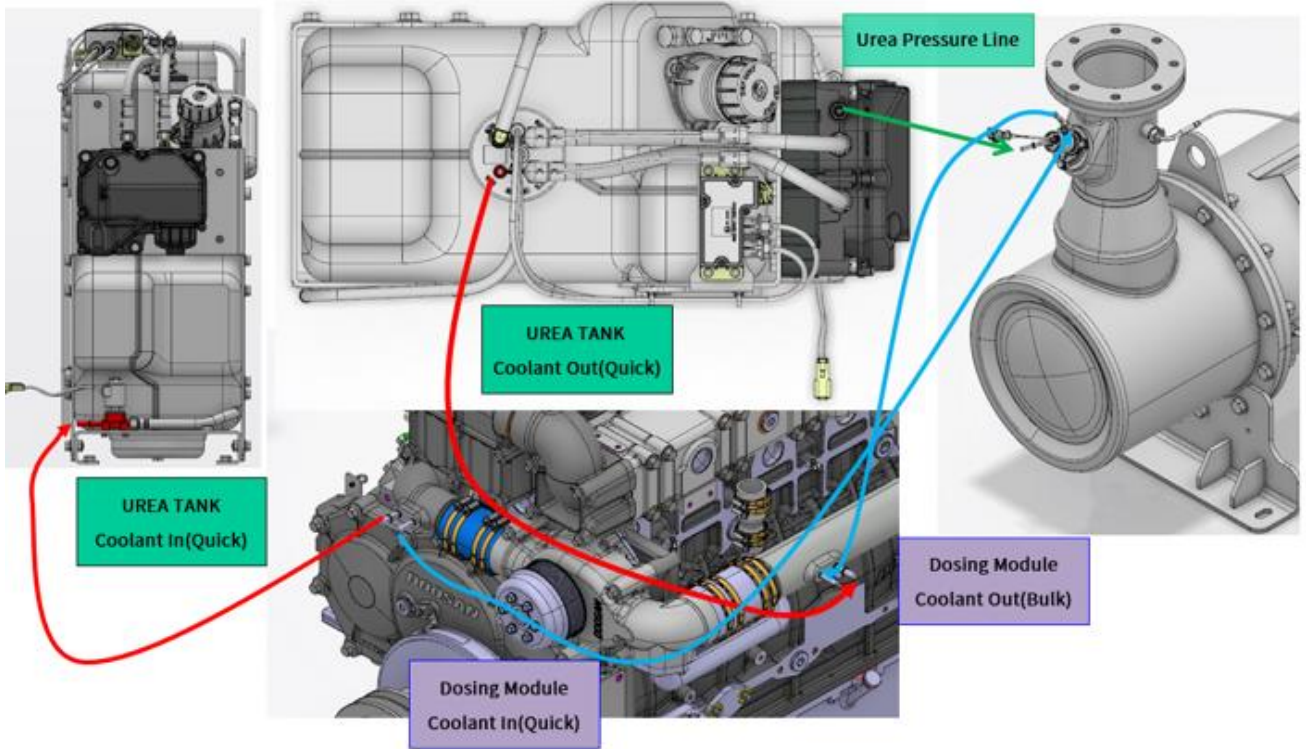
Urea Tank heating & Dosing Module cooling Hose connection (DX12)
